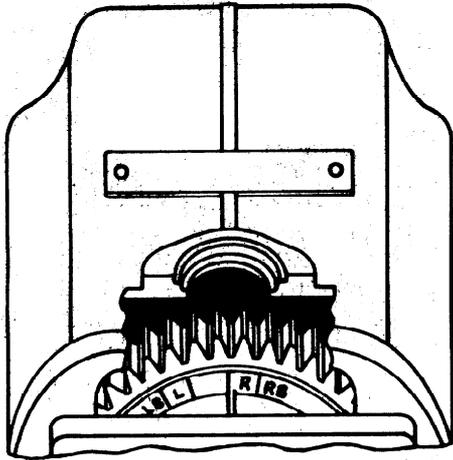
Alignment of Timing Marks on Distributor Gear — 6 Cylinder, Single Breaker, Right Hand Rotation
